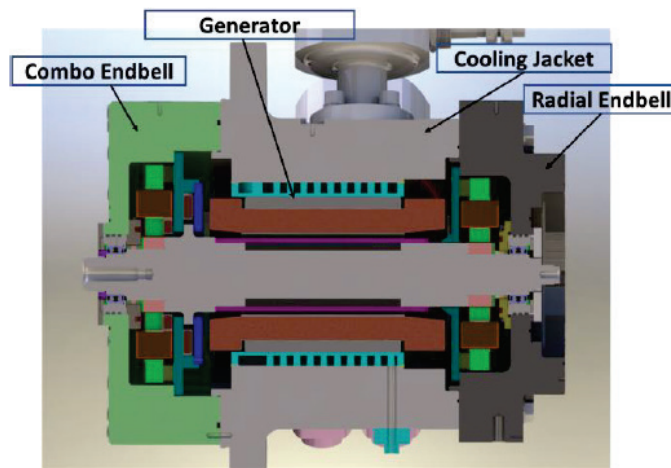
Schematic of the 300 kW turbine generator without the impeller [67]
